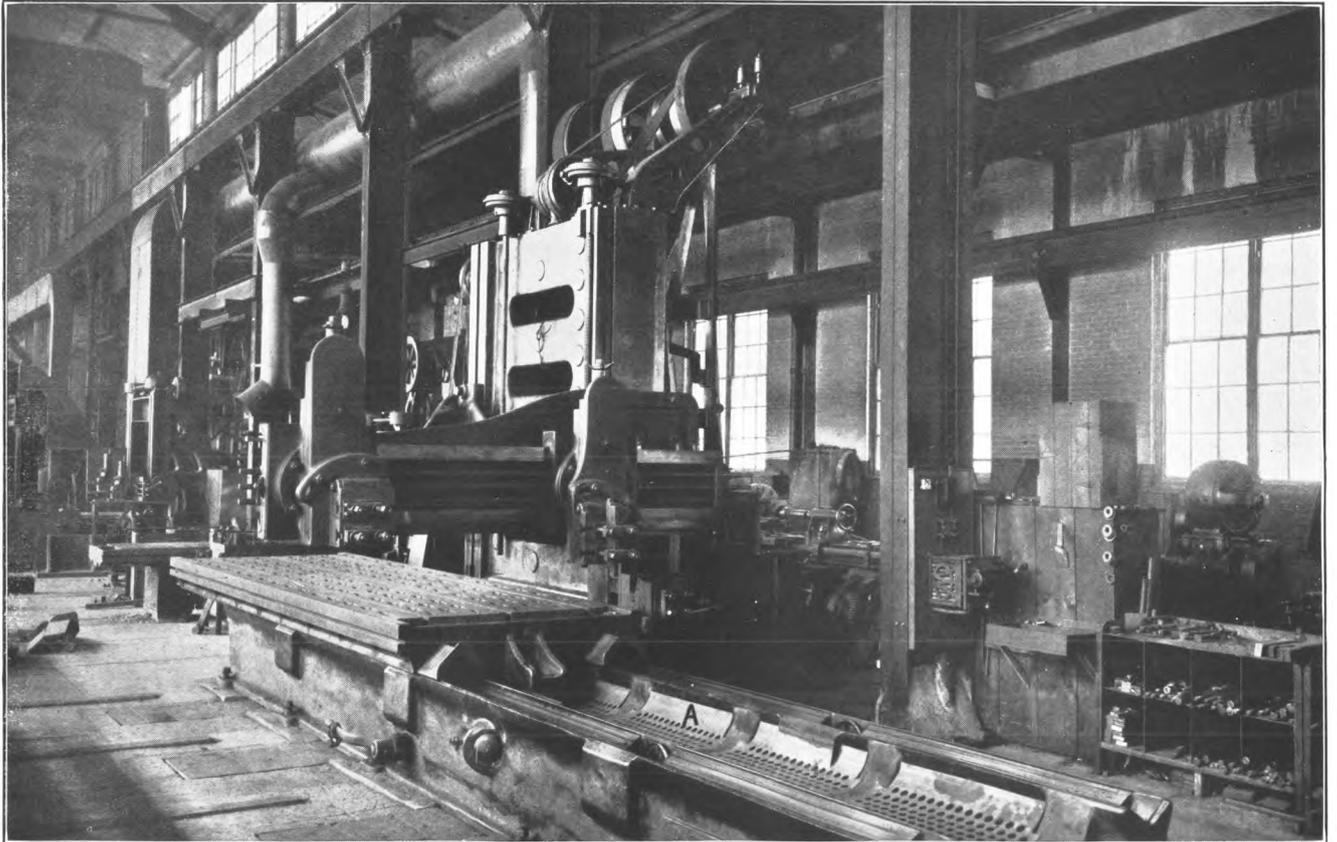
METAL PLANER, WITH SAFETY PLATES CLOSING OPENING IN BED.
